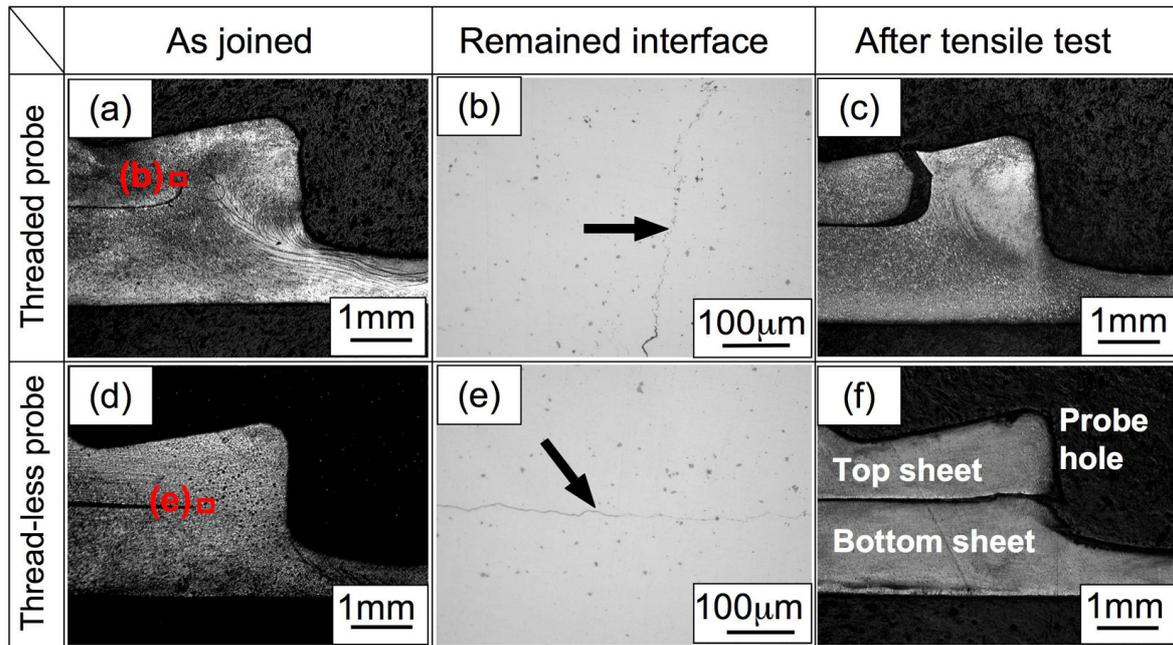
Cross sections of the FSJ joints; (a)-(c)with thread, (d)-(f) without thread; (a),(d)before tensile test; (c),(f)after tensile test
